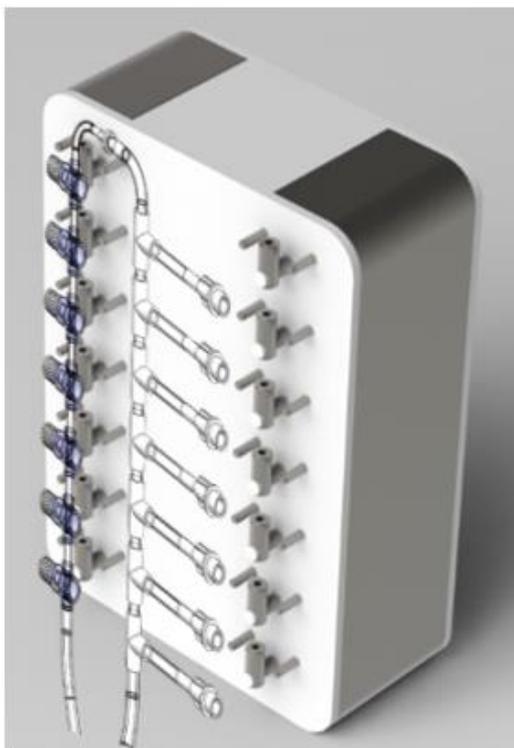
front view of the TPN module, together with a part of the disposable tube set
